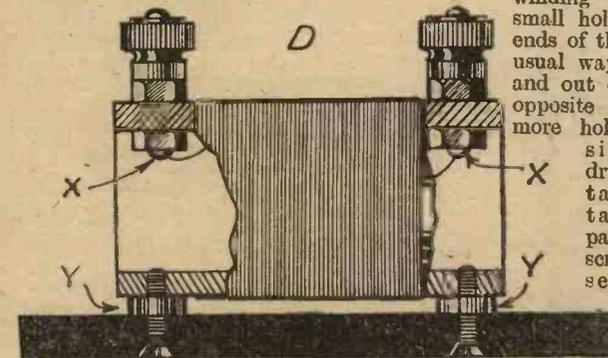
Sectioned view of the choke showing method of connection and spacing from the base.
